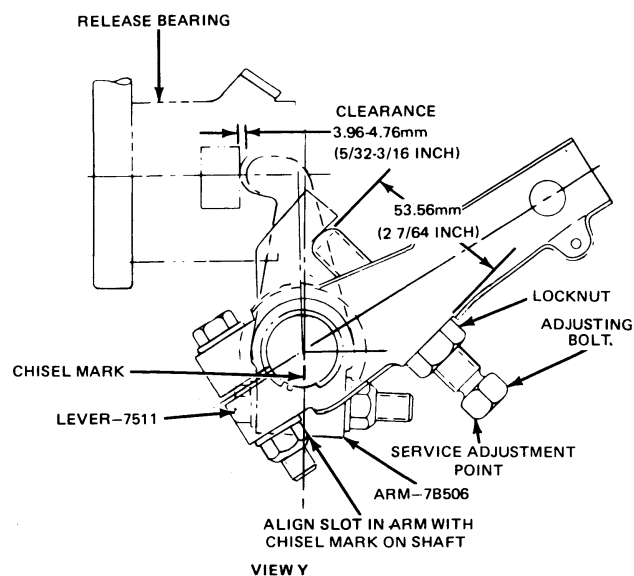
Clutch and Linkage—LN-600—700, L-, LT-, LN-, LNT-, LTS-800 with Gas Engines
